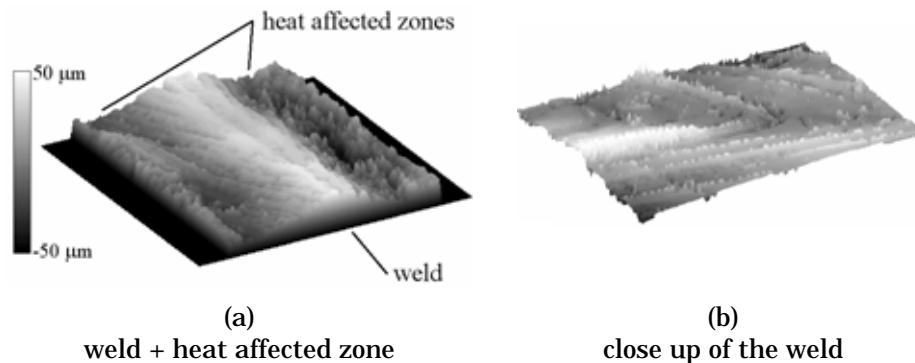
Surface micro-geometry of a laser weld in a tailor welded blank.
